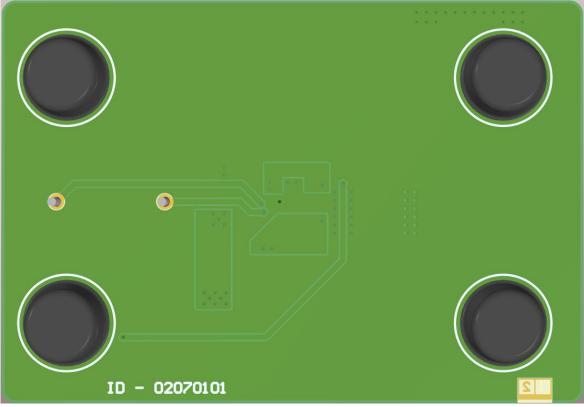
Boost & Buzzer Driver Demo PCB Design (Bottom Side)
